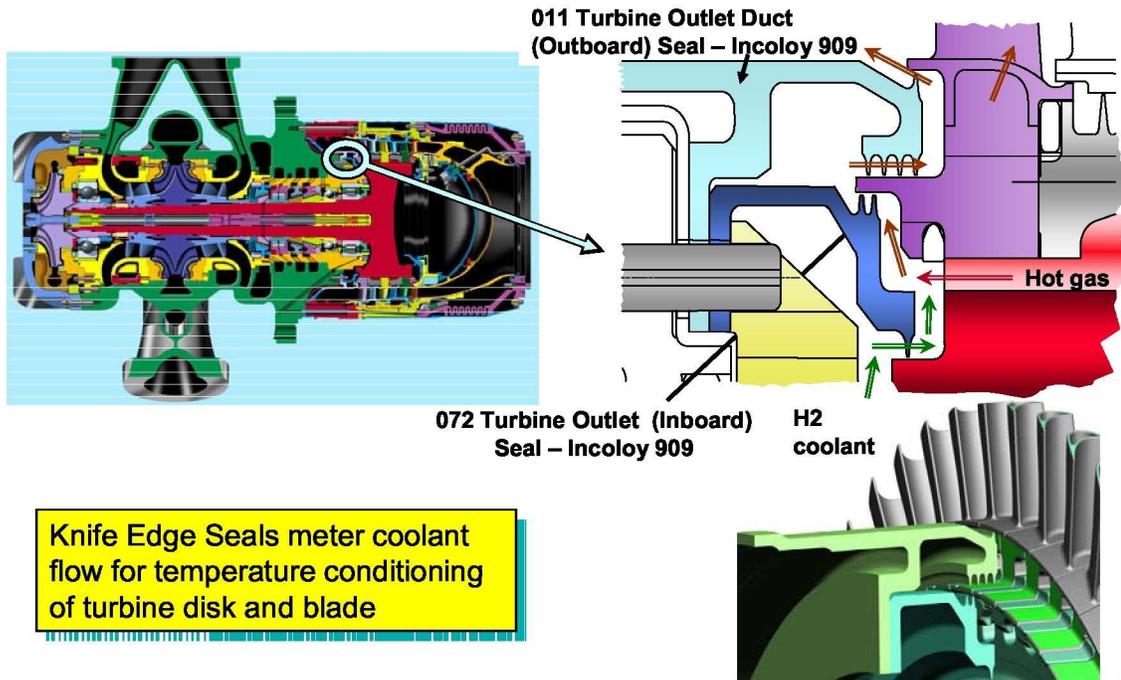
HPOTP Inboard and Outboard Knife Edge Seals Prior to Redesign
